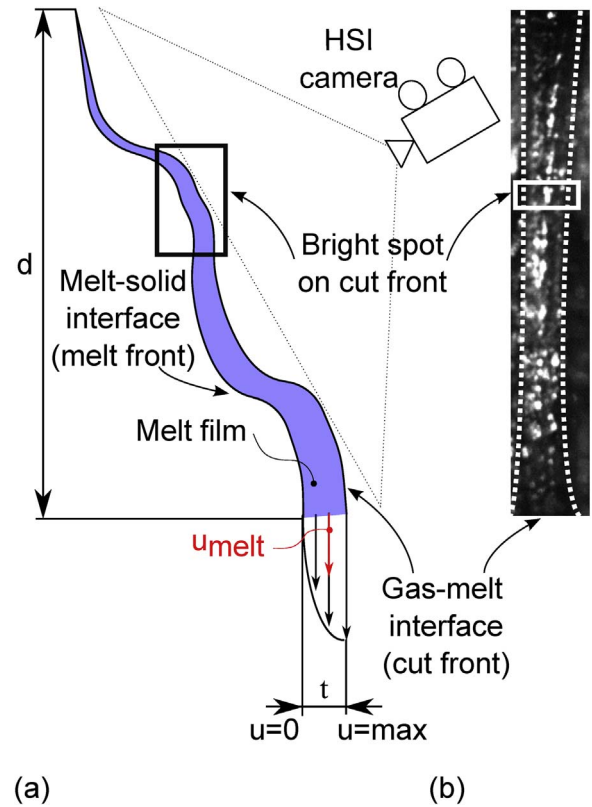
(a) The HSI set-up and (b) a single frame from the HSI film showing bright spots on the cut front.
